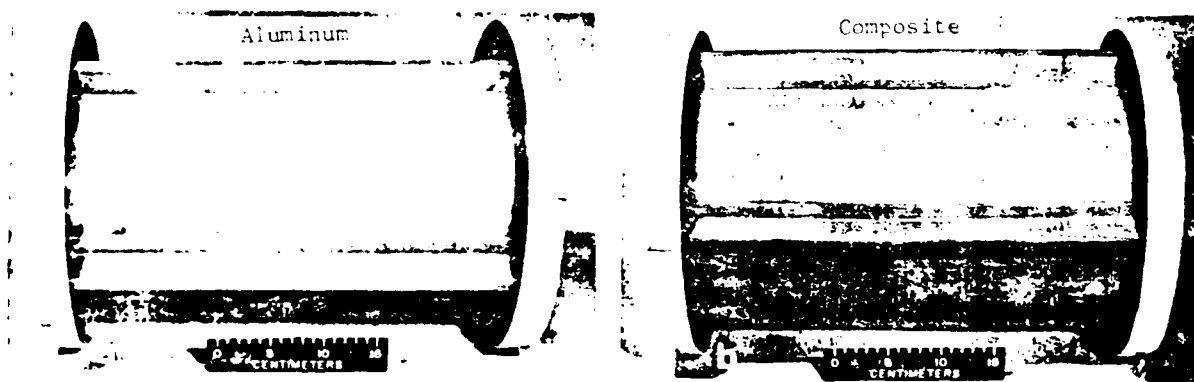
Externally Stiffened Specimens (Ref. 25)
